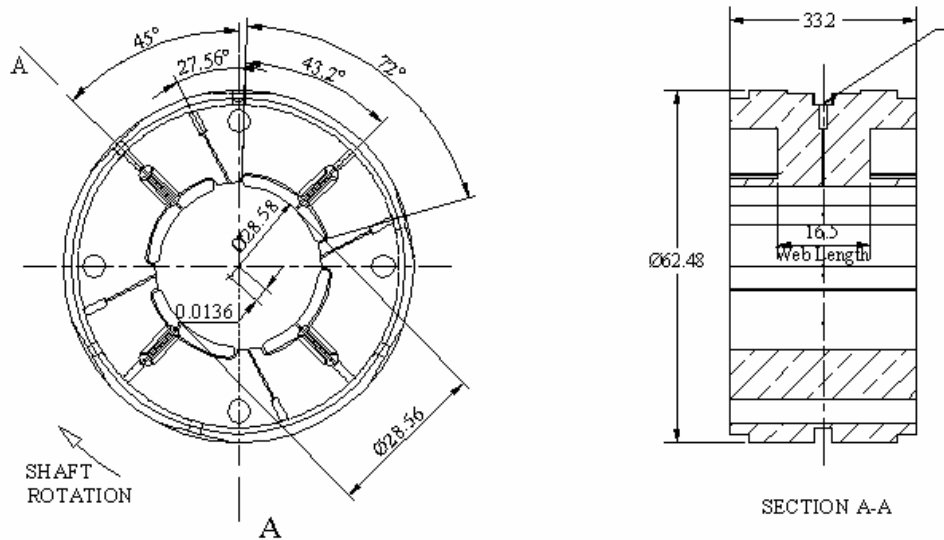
Dimensions of flexure pivot – hydrostatic bearing
